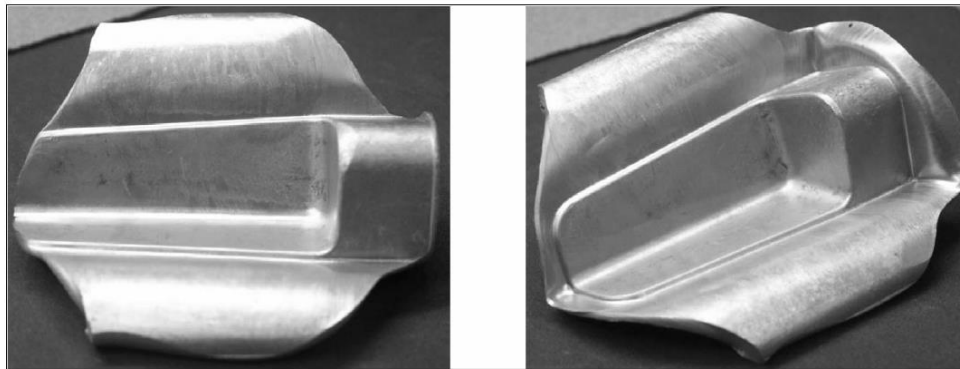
Forged Parts (left: forged at 182°C, right: forged at 338°C) [30]
